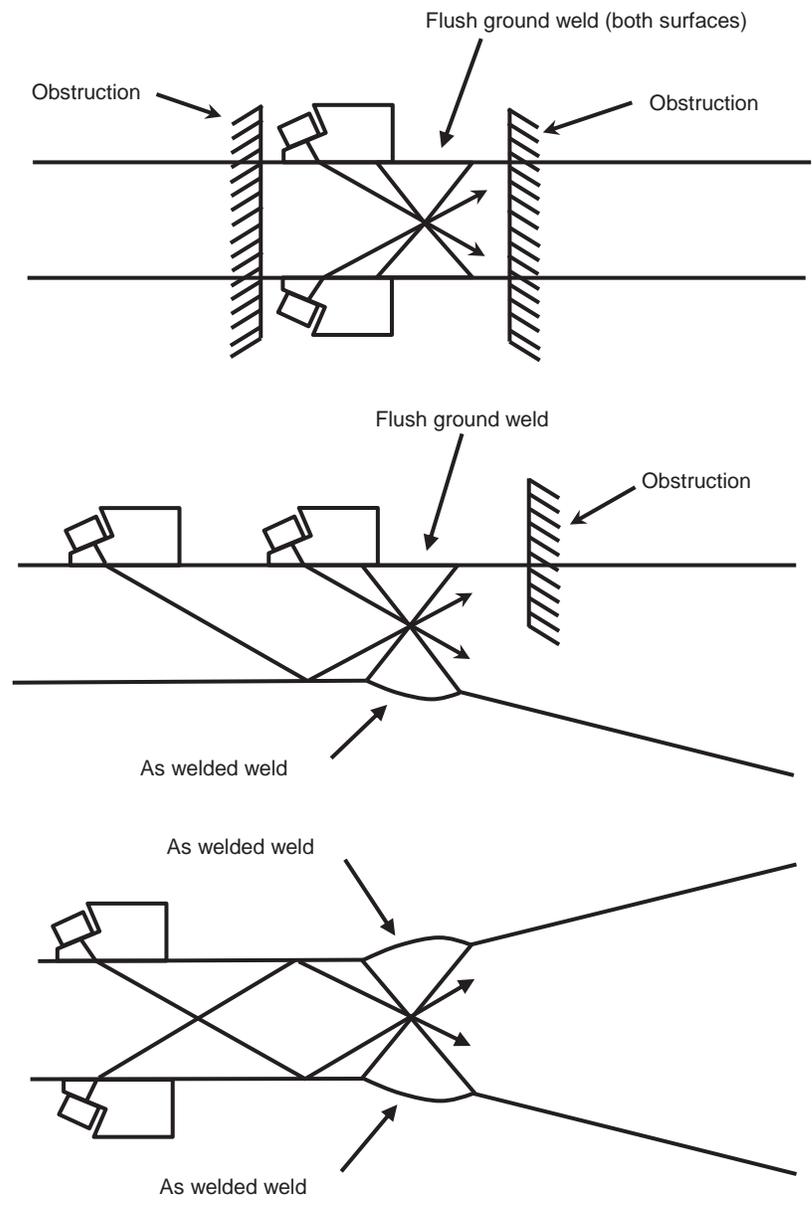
Example One-Directional Coverage Techniques for Butt Welds.
